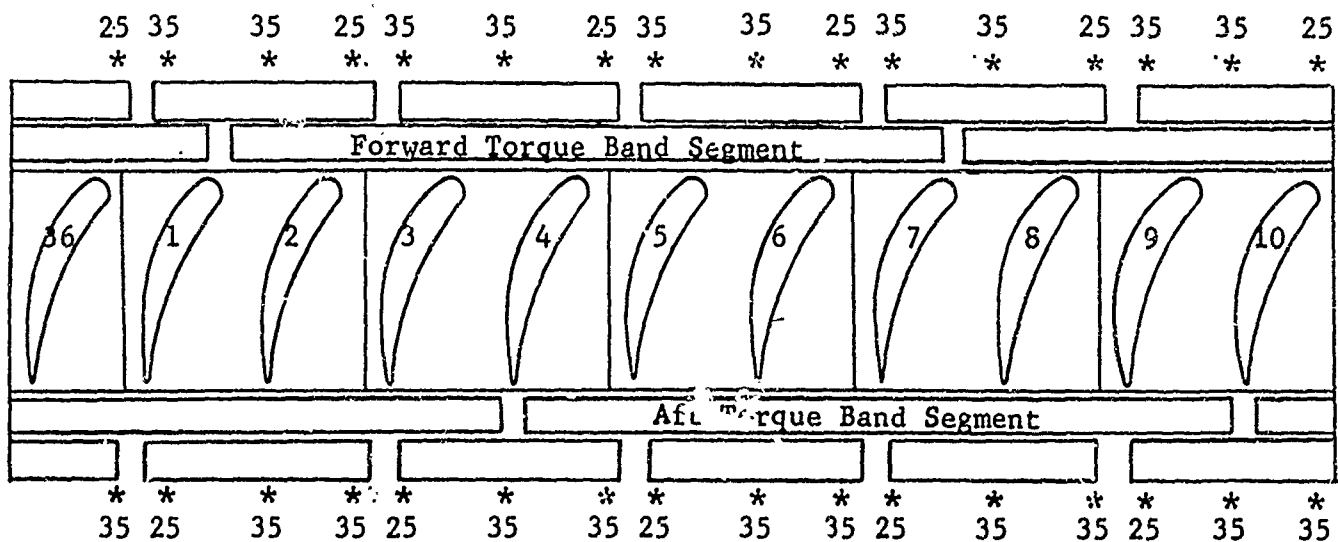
EXIT LOUVER LOCATION FIXTURE
